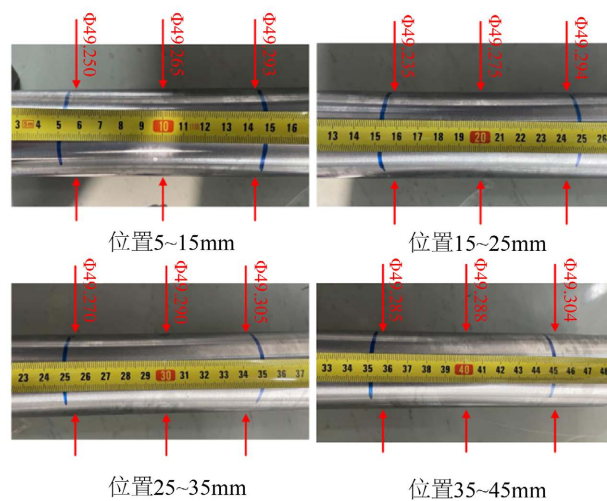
Machining measurement results of parts after instruction feed depth optimization
